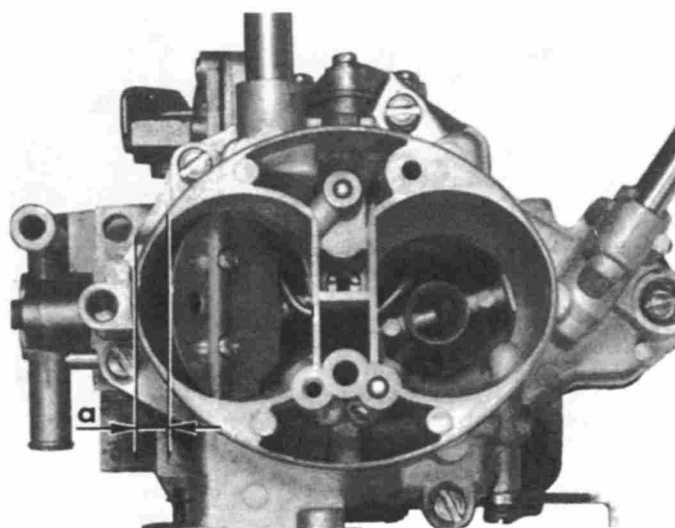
Measurement of choke pull-down or dechoke clearance (Sec 4)
